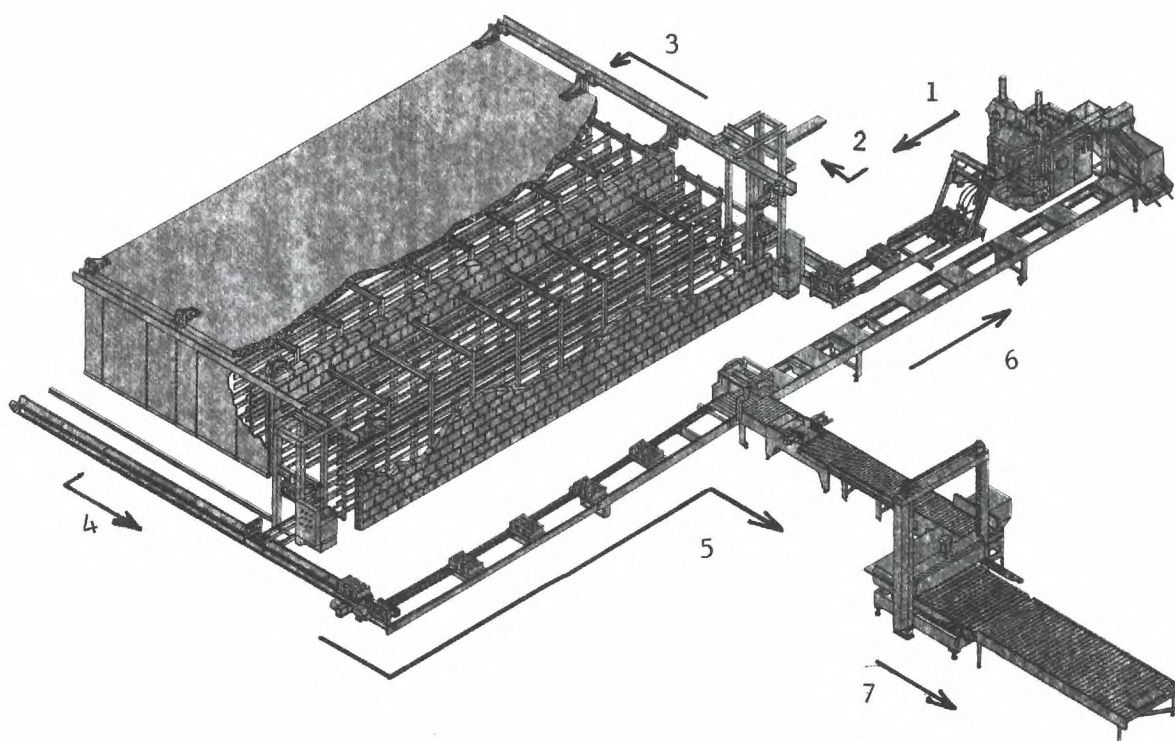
Block Handling Equipment with Racks Fixed in the Kilns
